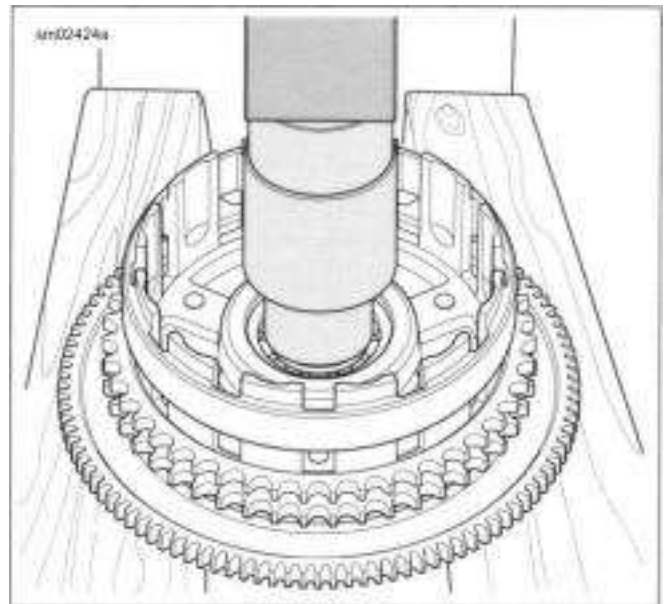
Pressing Bearing From Clutch Shell Assemble
